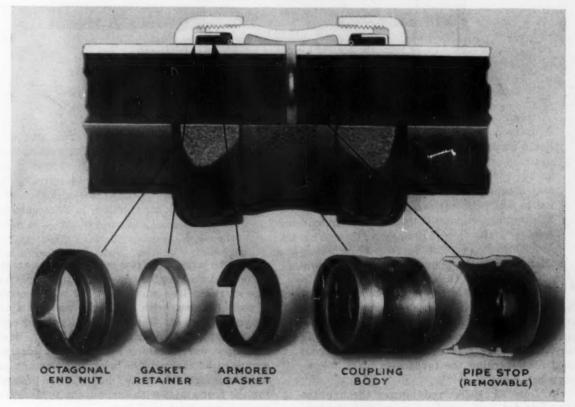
Cutaway section of a No-Thread coupling used for the furnace piping. The same parts are used in all fittings, with bodies of the required type.
